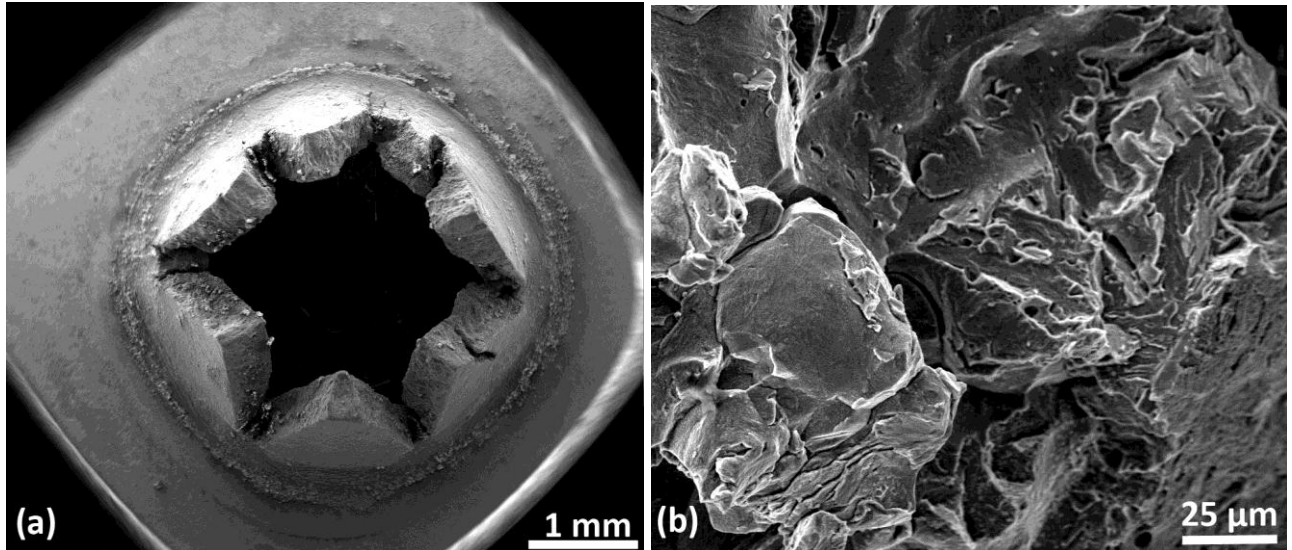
Fracture in air of TR750 specimen a) Principal crack, b) Ductile fracture surface
